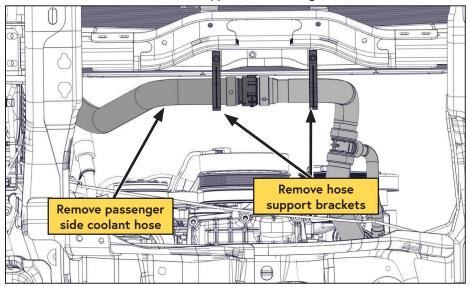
Removing lower coolant hoses (viewed from under vehicle)
